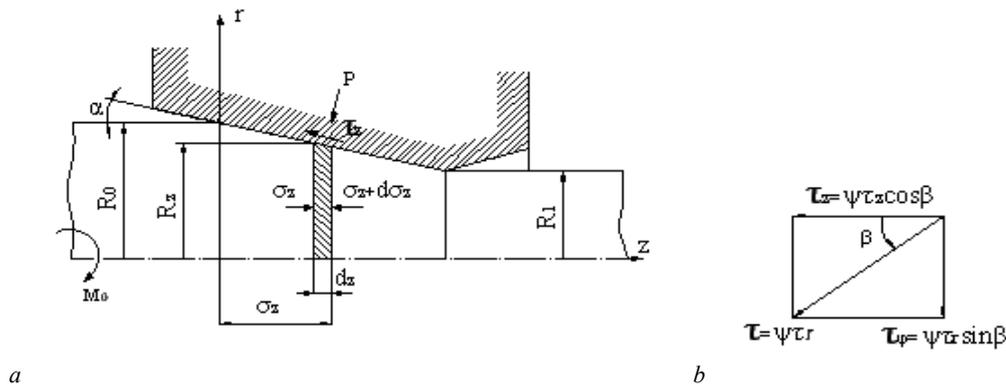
Scheme to determine the pressing pressure of a workpiece with torsion:
